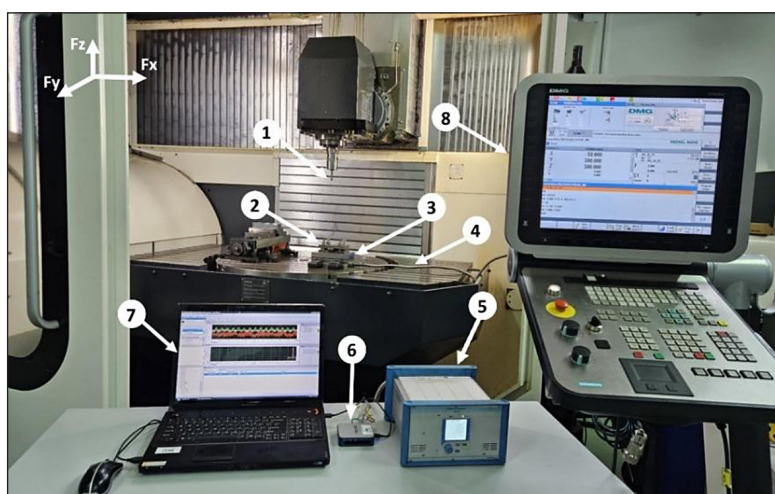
Test stand: 1 – tool, 2 – machine vice, 3 – Kistler 9257B dynamometer, 4 – connection cable, 5 – Kistler 5070A charge amplifier, 6 – DAQ system, 7 – PC with DynoWare, 8 – machine tool control panel
